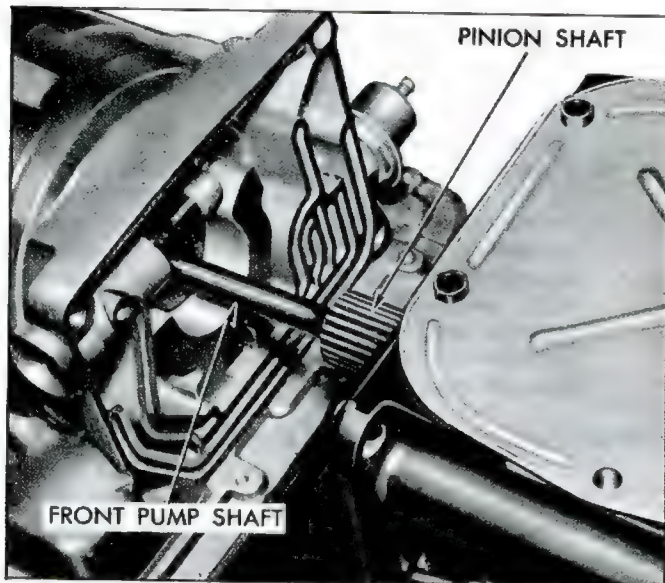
Engaging Pinion Shaft-to-Transmission Planet Carrier Splines
